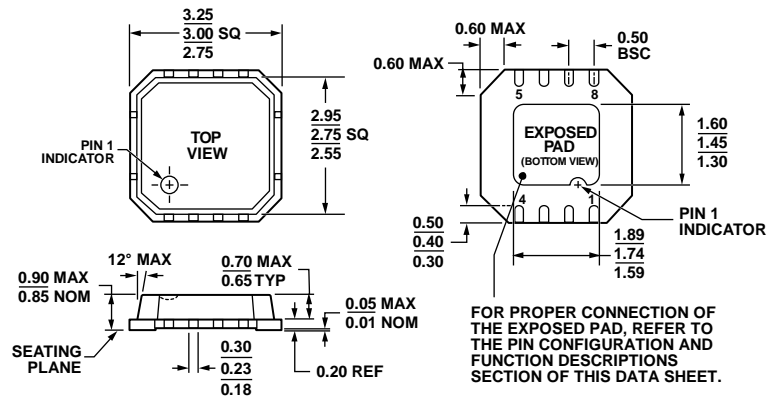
8-Lead Lead Frame Chip Scale Package [LFCSP\_VD]
